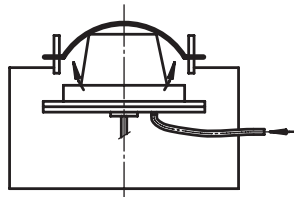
Preforming with preblow (this is not possible in all thermoforming machines)
